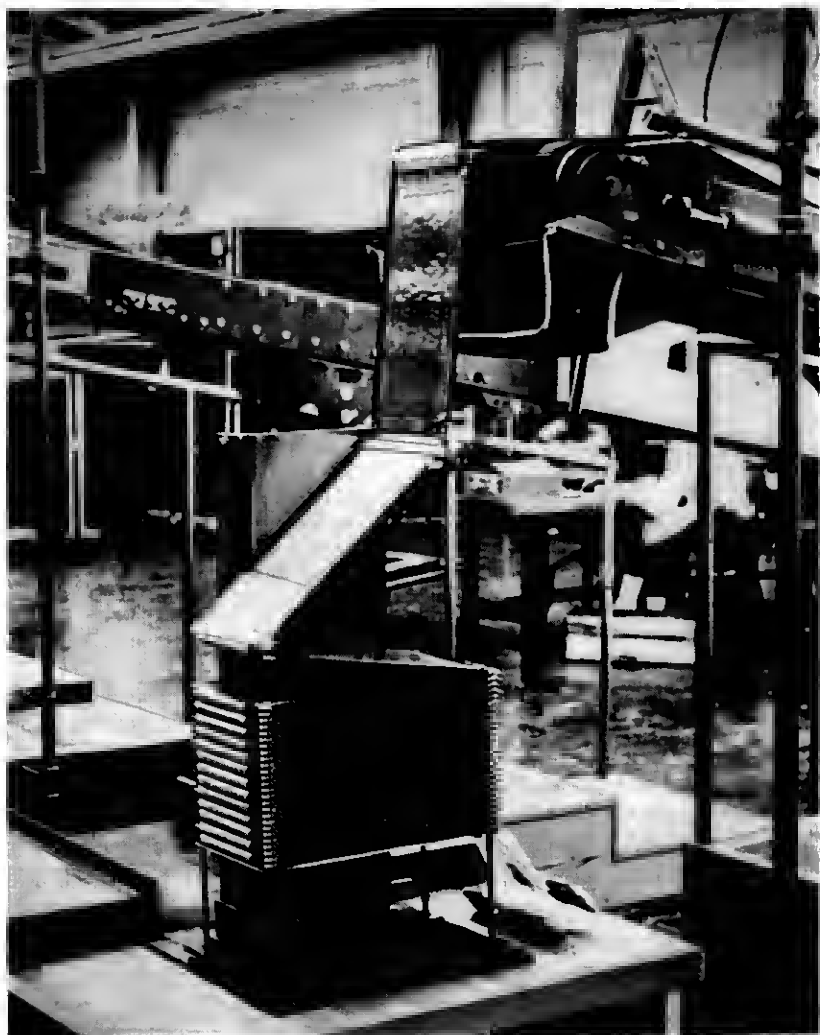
Twistor module assembly operation in Western Electric Company plant.
